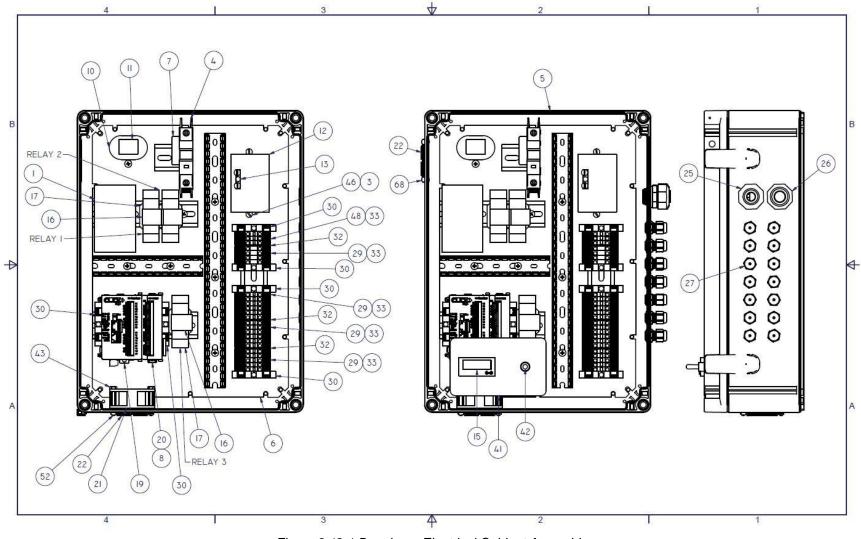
Drawing – Electrical Cabinet Assembly
